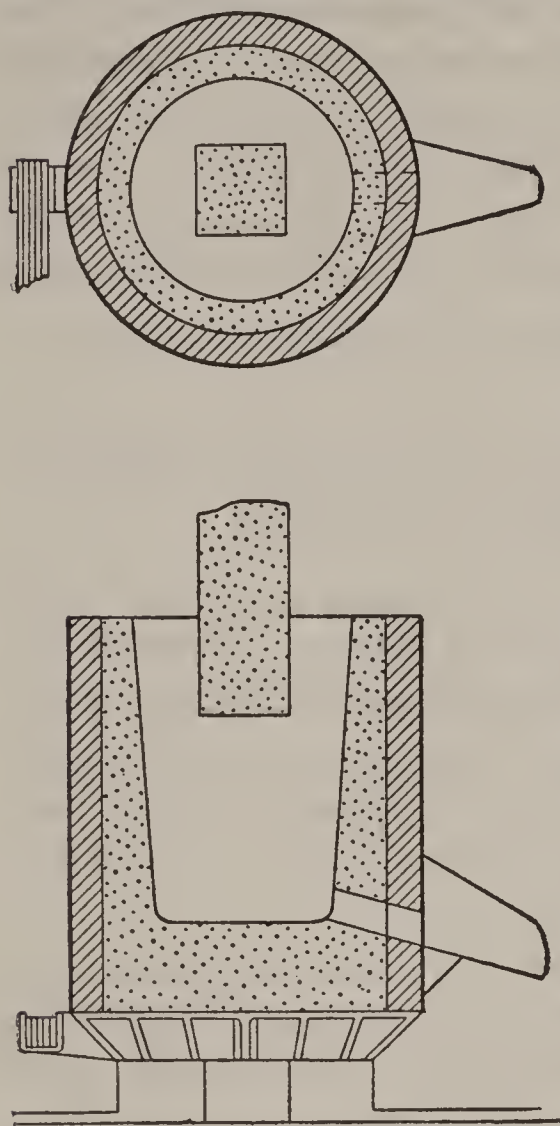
Plan and elevation of Siemens type of ferrosilicon furnace.
